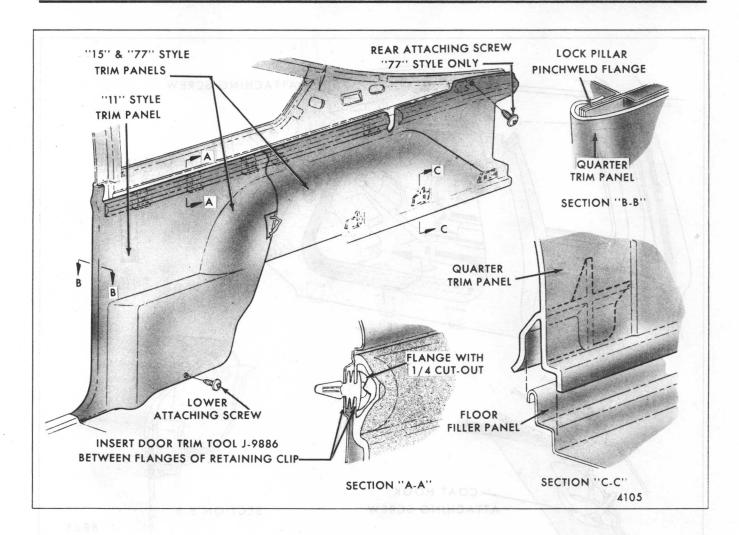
"H-11,15 and 77" Rear Quarter Trim Assembly ("H-07" Similar)
